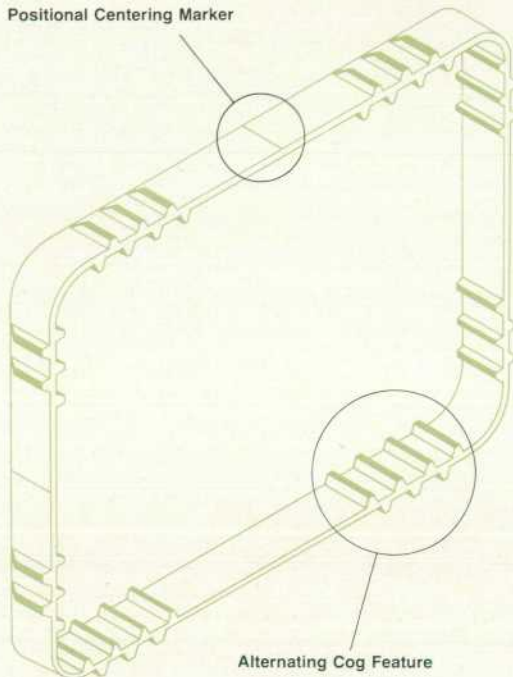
Injection-molded elastomer belt for shock-mounting and alignment of 1980A/B CRT.
